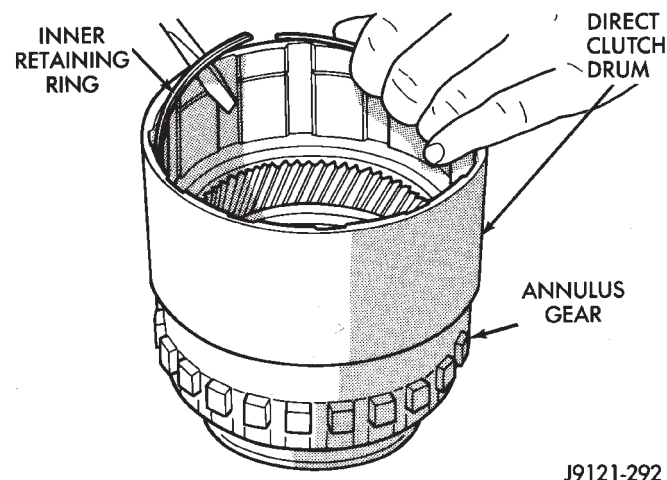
Removing Clutch Drum Inner Retaining Ring
